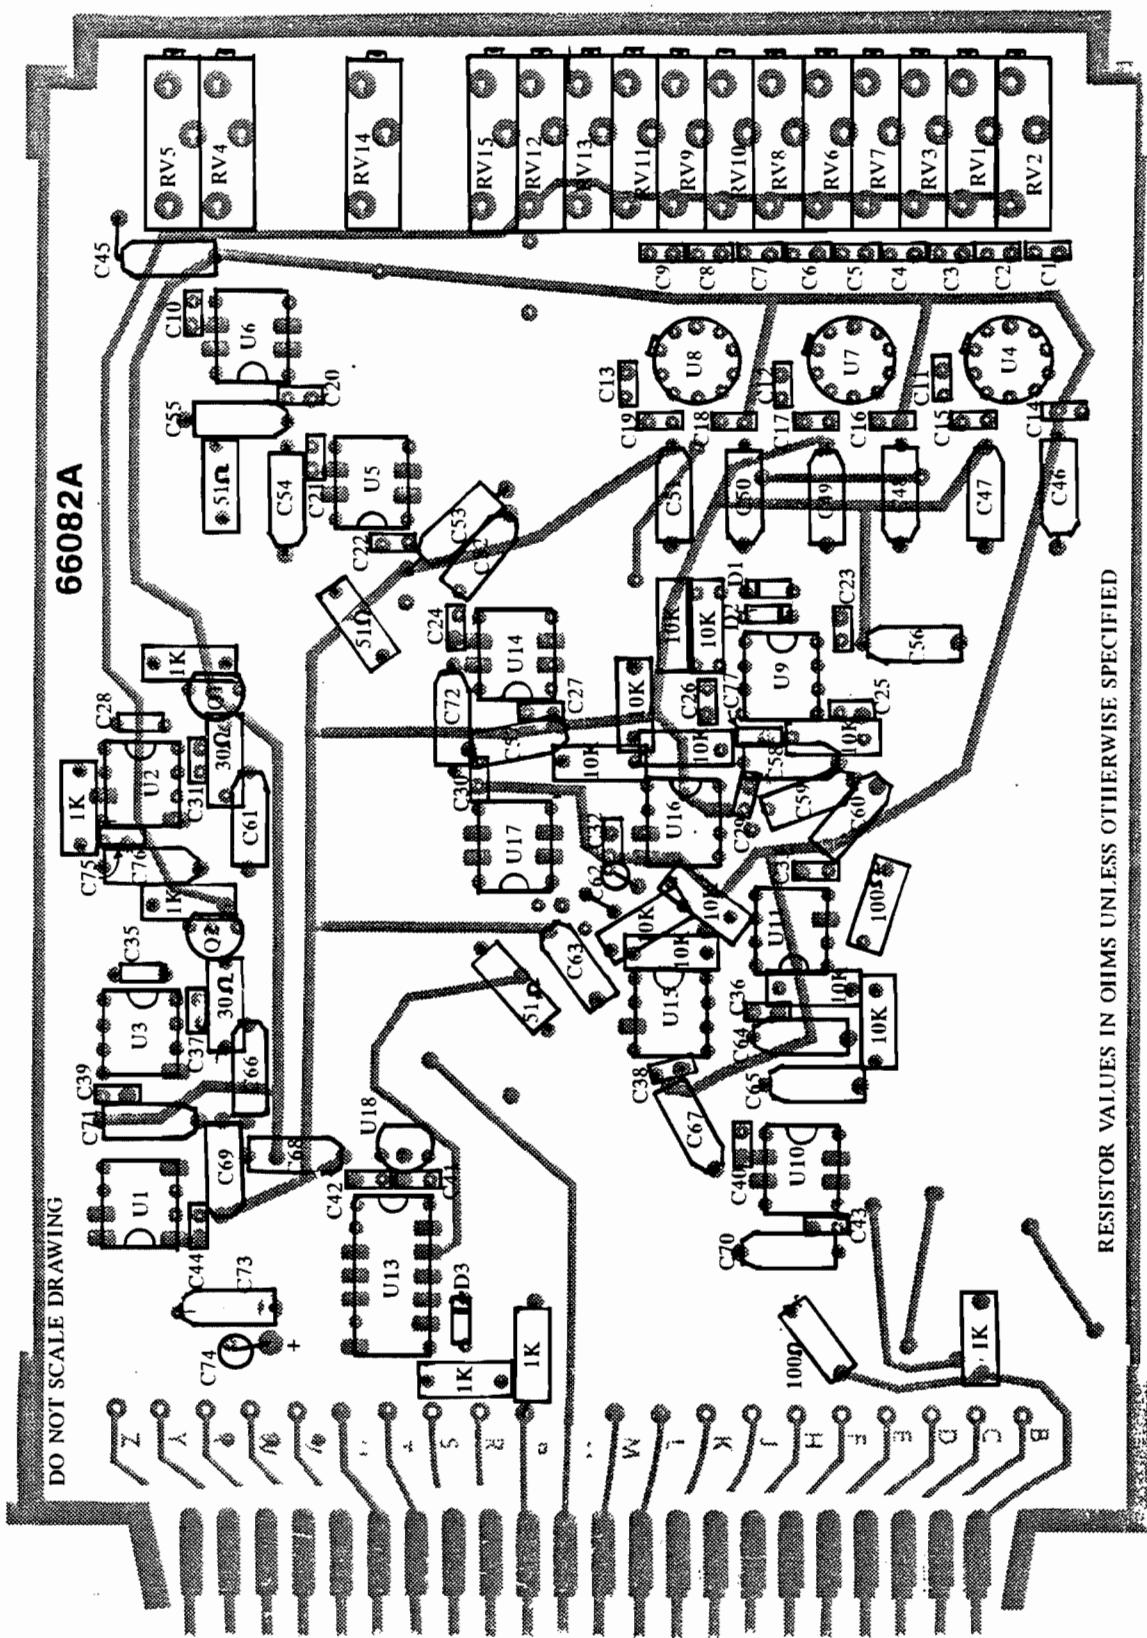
COMPONENT LAYOUT FOR CARD 66082A
